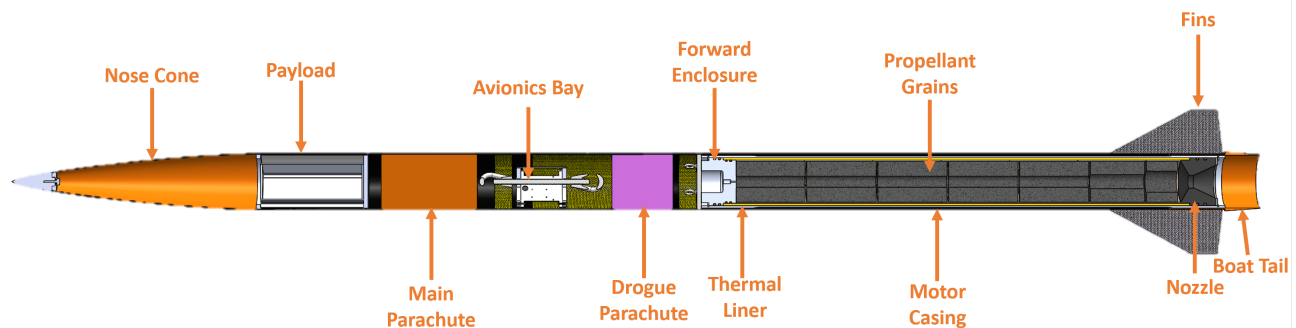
Full-Scale Launch Vehicle Design - Cross-sectional Views
